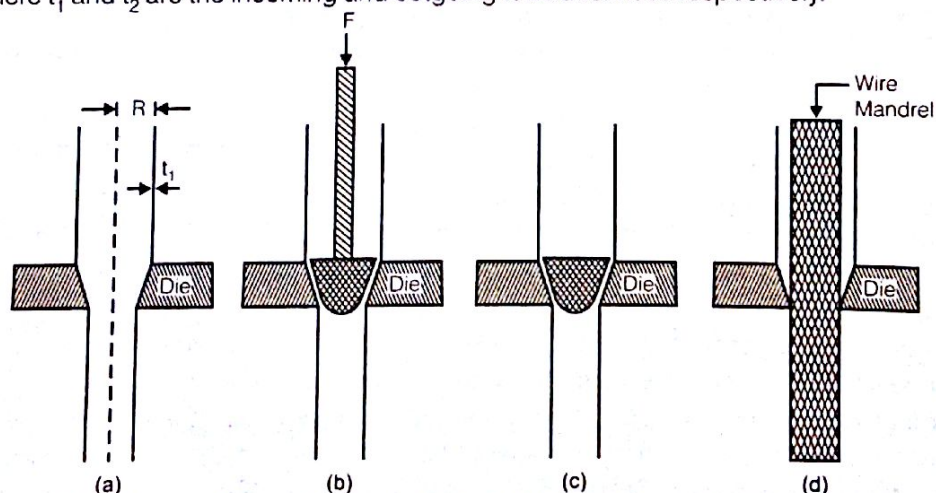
(a) : (a) Tube sinking operation. (b) tube drawing with fixed mandrel
